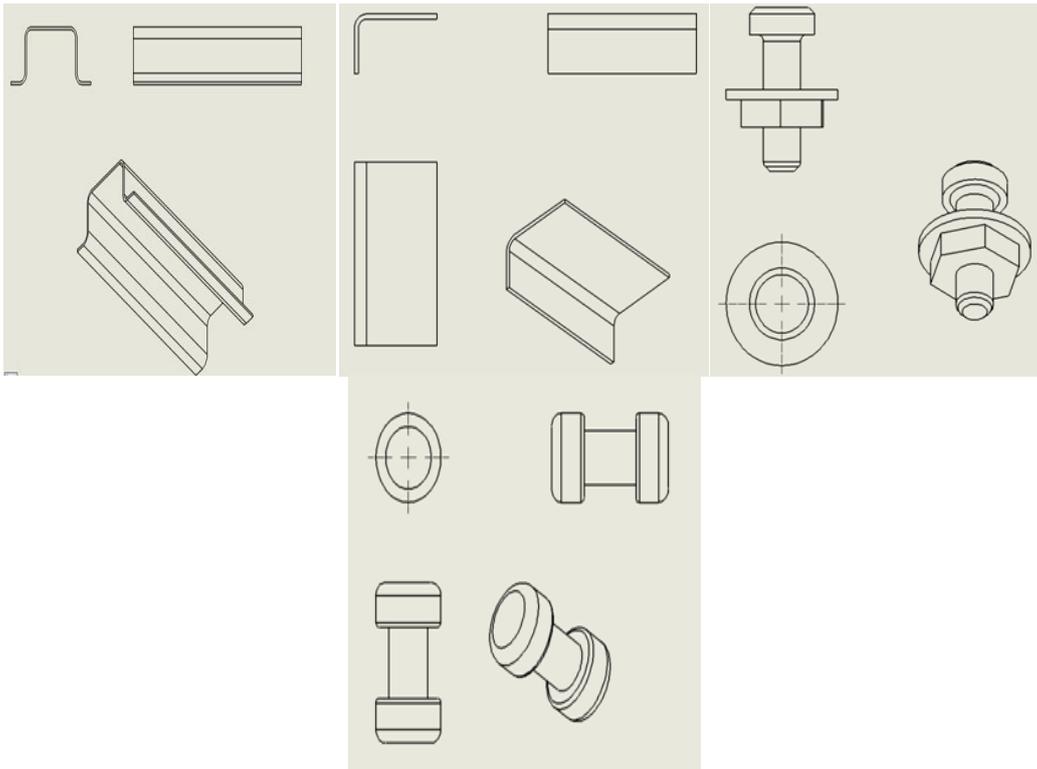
Part drawings of components in SOLID WORKS 2011
